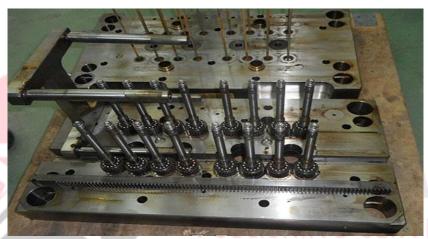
Complete disassembly, inspection, and inspection of all assembled parts
